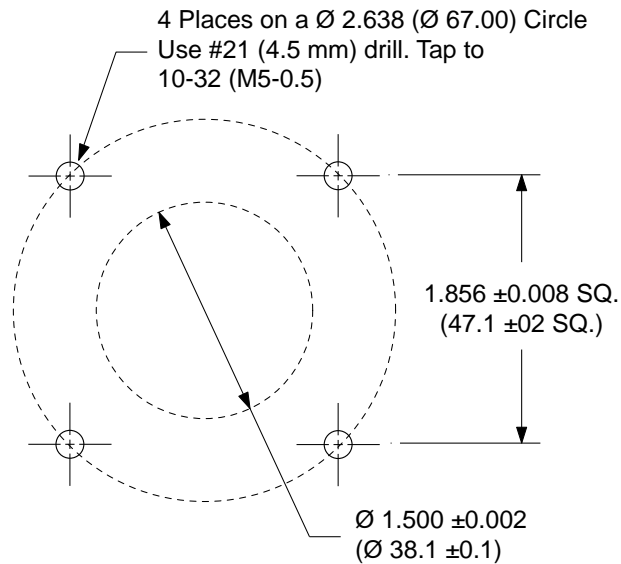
Mdrive linear actuator mounting and drill pattern
